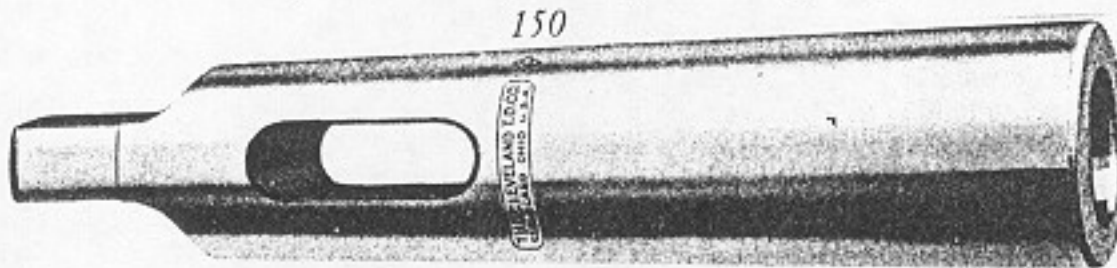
Drill sleeve adapters for Morse taper shank drills or taper sleeves are used when it is necessary to increase the size of the taper of a taper shank drill. (Courtesy Cleveland Twist Drill Co.)
